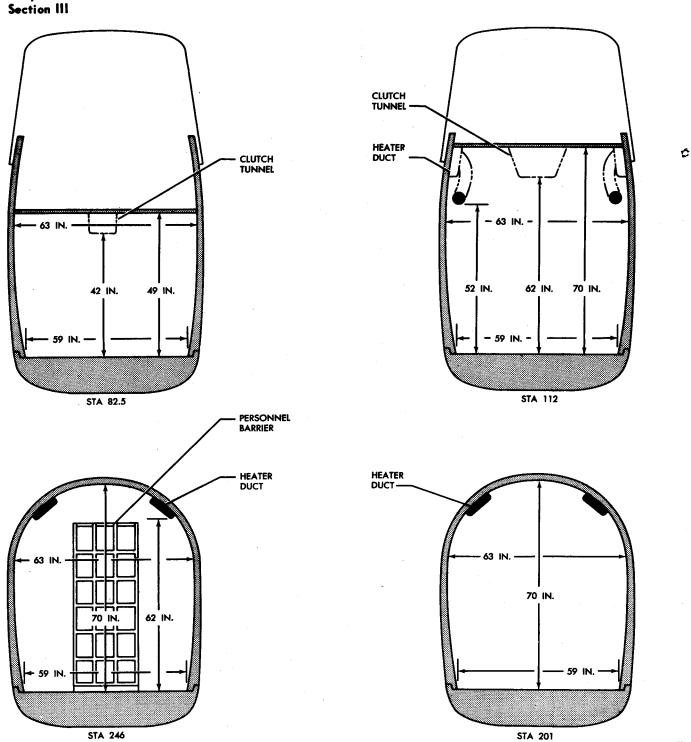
Cargo Compartment Dimensions (Sheet 2 of 2)
